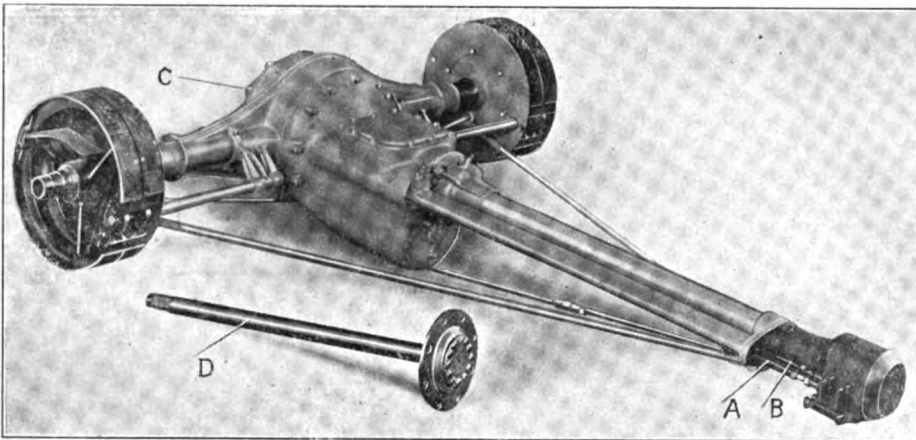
MARION AXLE-MOUNTED CHANGE GEAR SET
